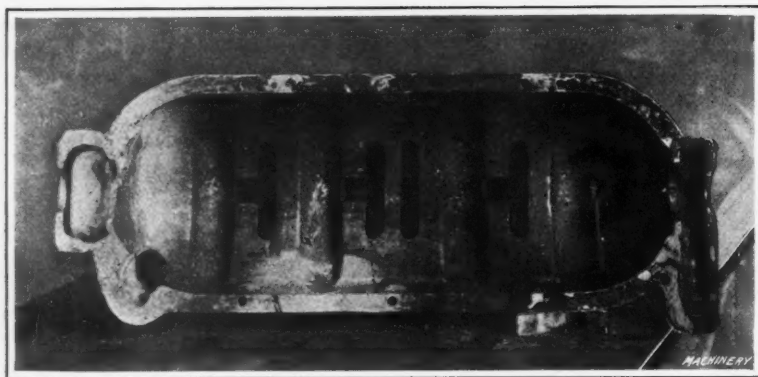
Inside View of Repaired Lower Half of Crank-case
